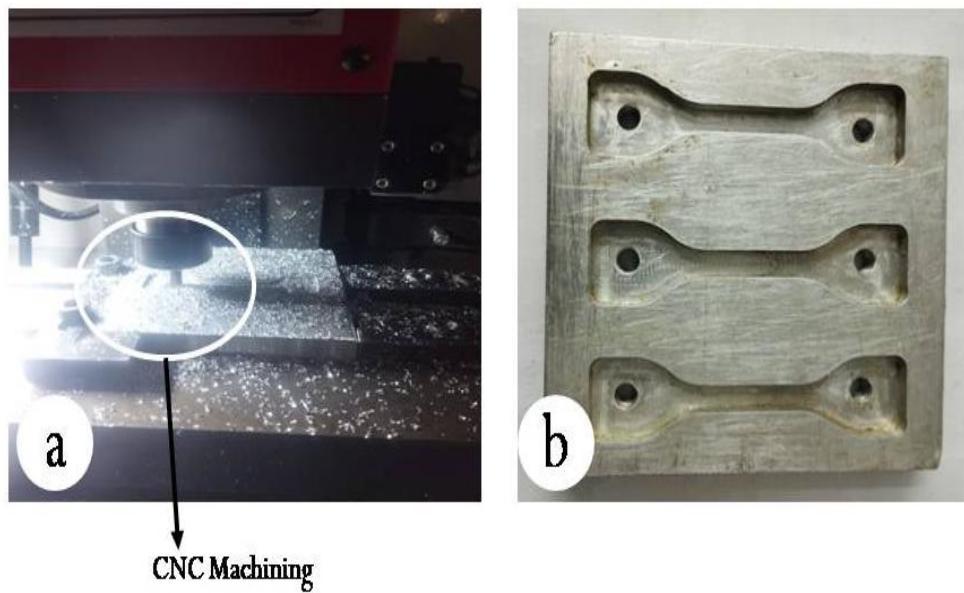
Multi cavity mold (A) cnc machining (B) front view of mold
